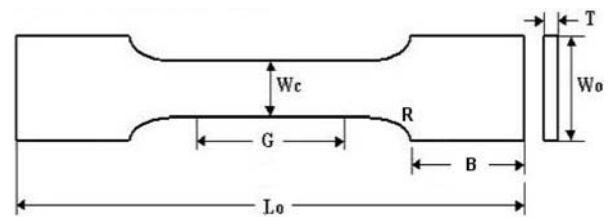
ASTM E8M tensile specimen. Lo : 100, G : 25, Wc : 6, Wo : 10, T : 6, B : 28, R : 6 (mm)
